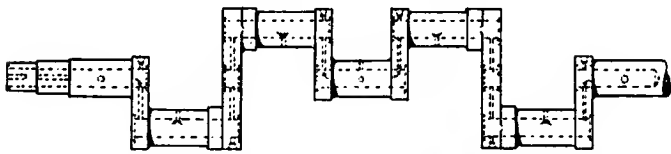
Three-bearing crankshaft drilled for lubrication.
